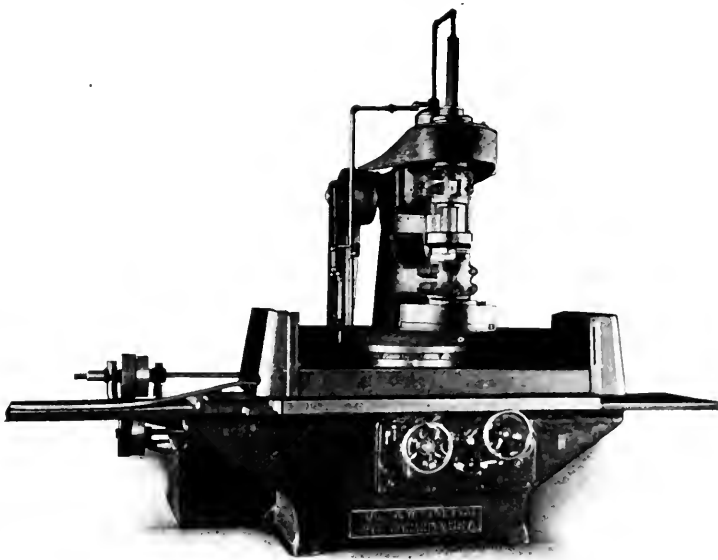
Front View of Pratt & Whitney 22-inch Vertical Surface Grinder
